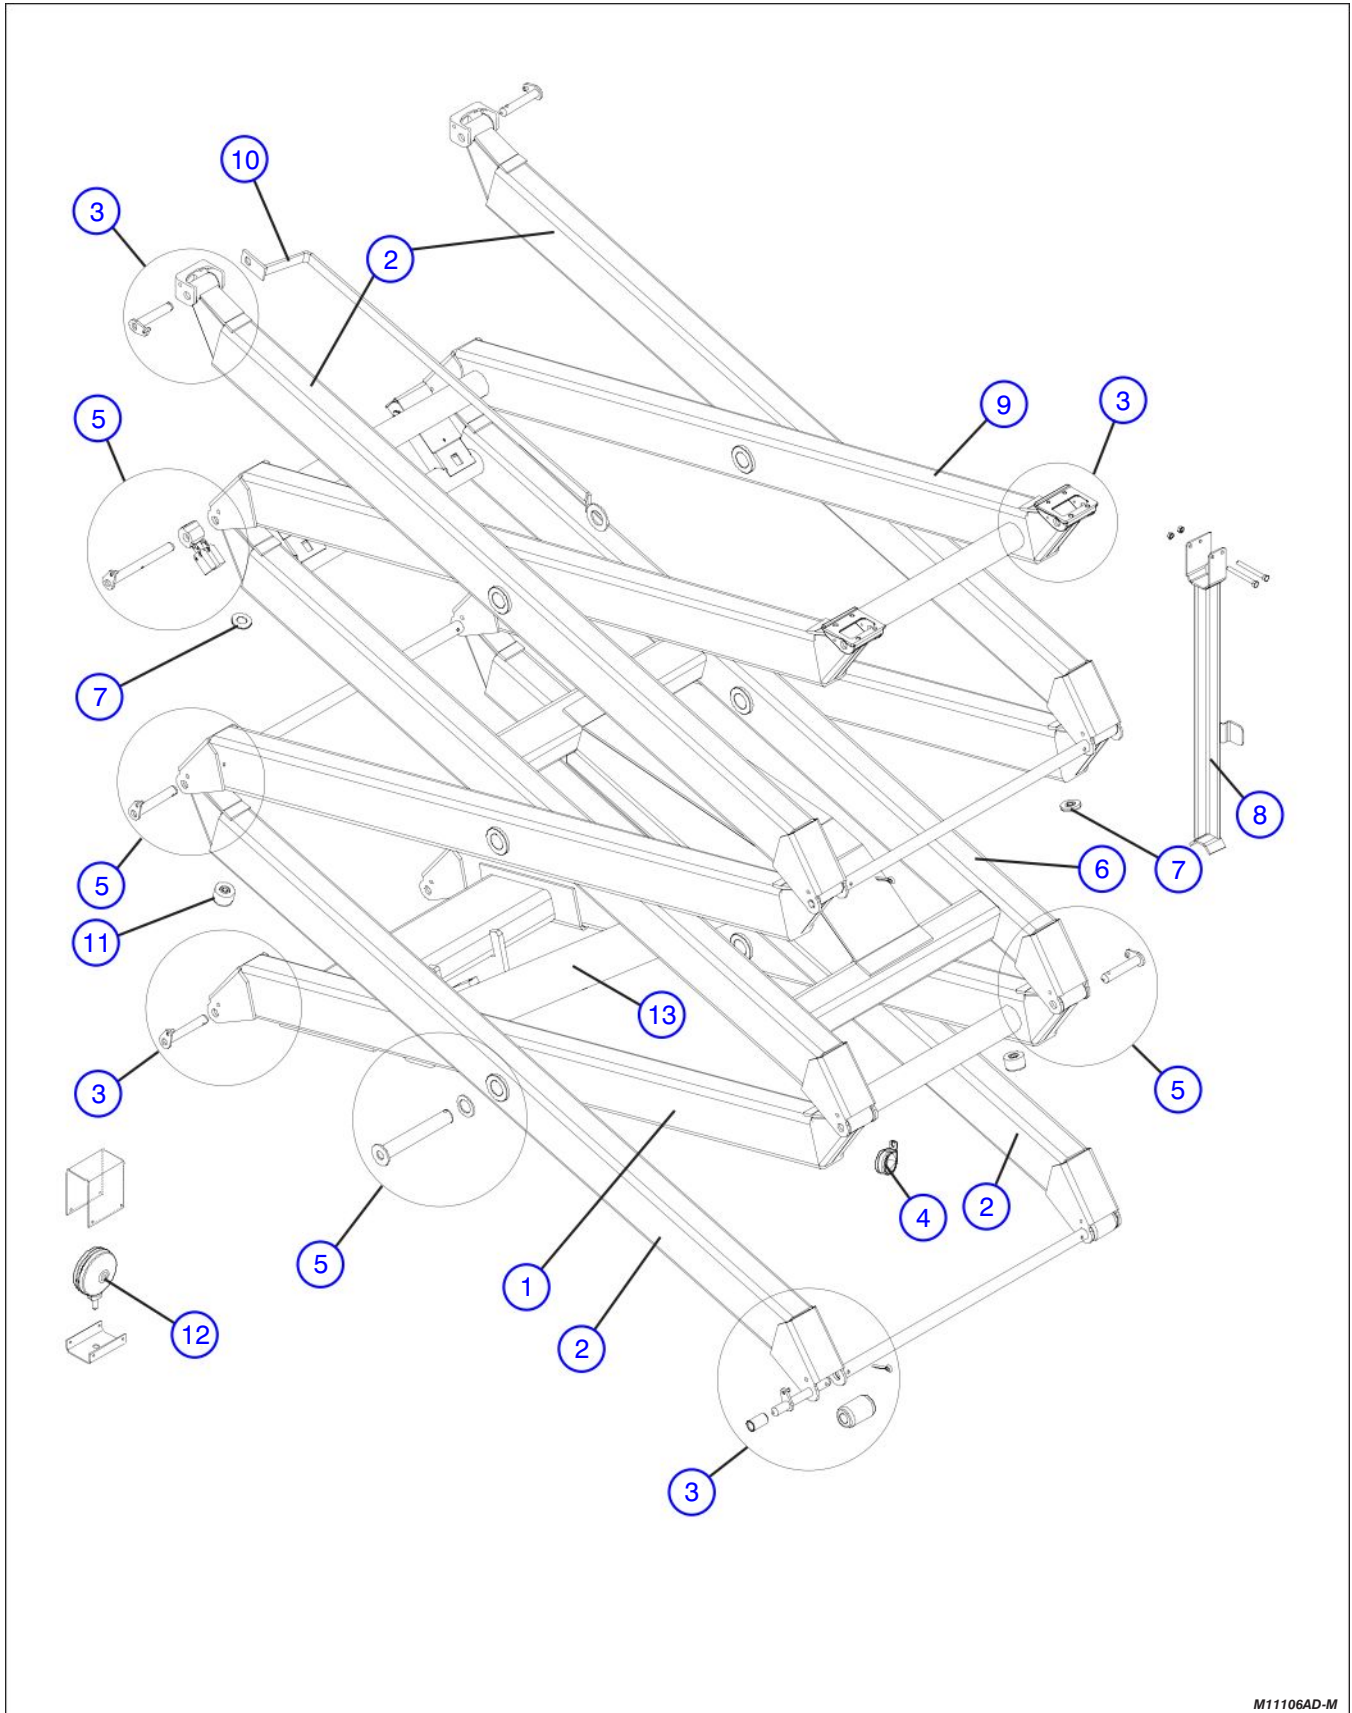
Scissor Arm Control Cable Assemblies
